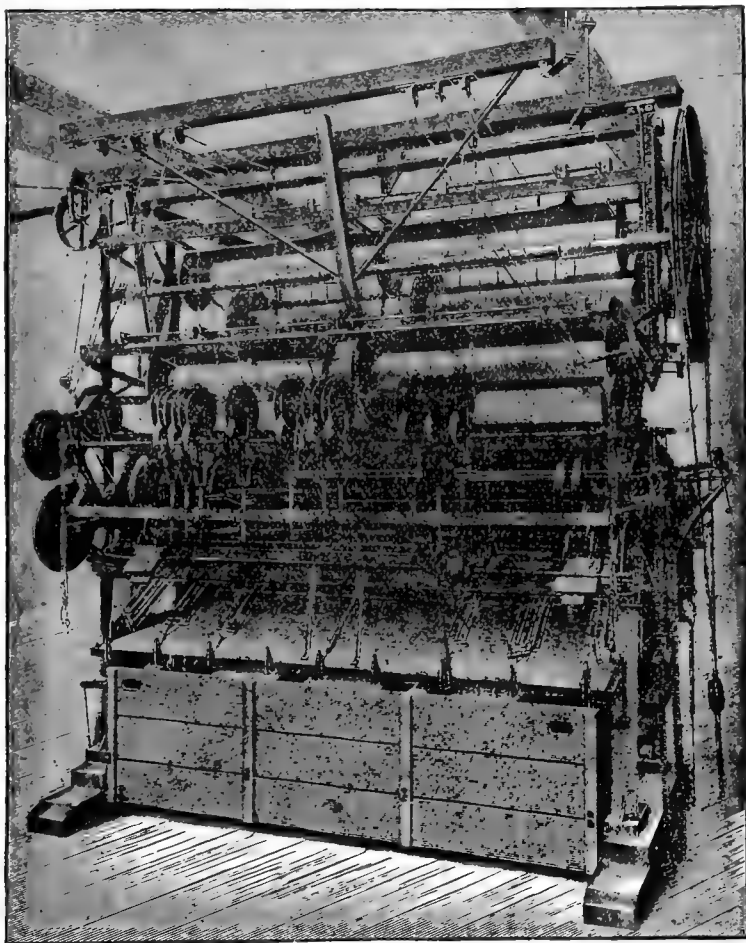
The Paget warp-knitting machine. (Rear view.)
